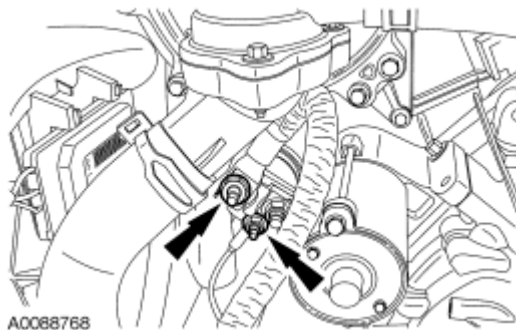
Locating Upper Torque Converter Housing Bolts
